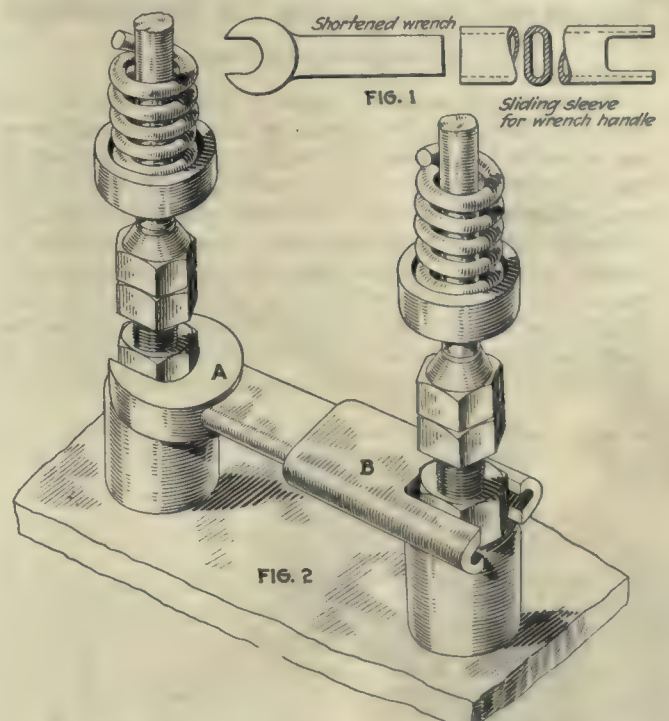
DETAILS OF SPECIAL WRENCH. FIG. 2—THE WRENCH IN USE
